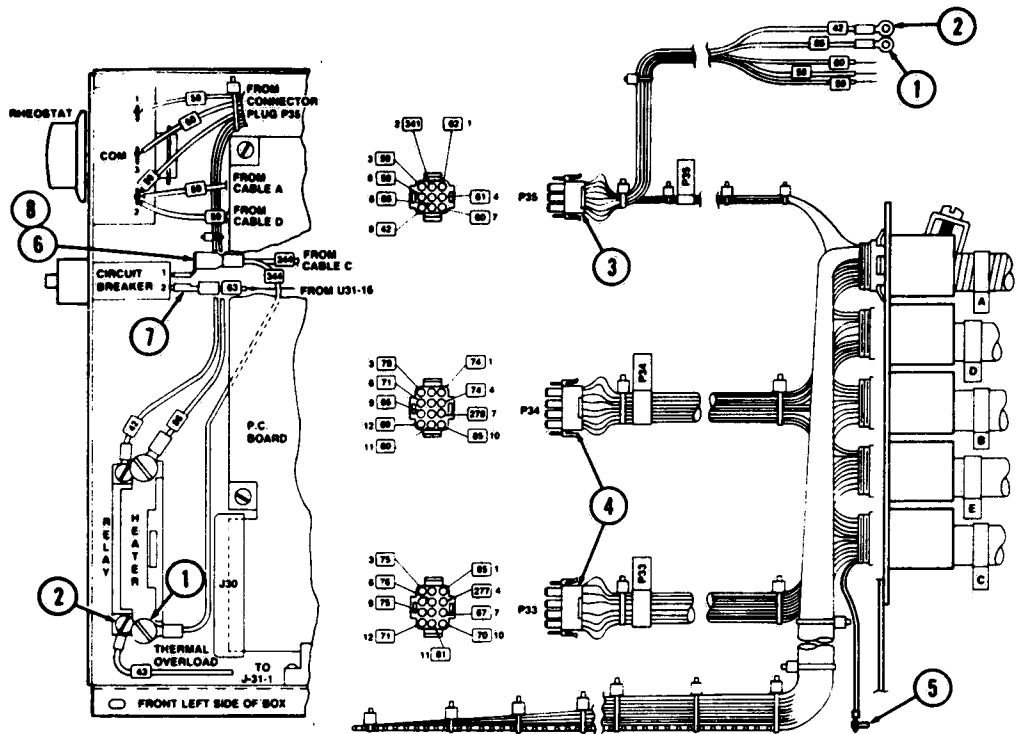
A. RELAY BOX ASSEMBLY: Power Door.
